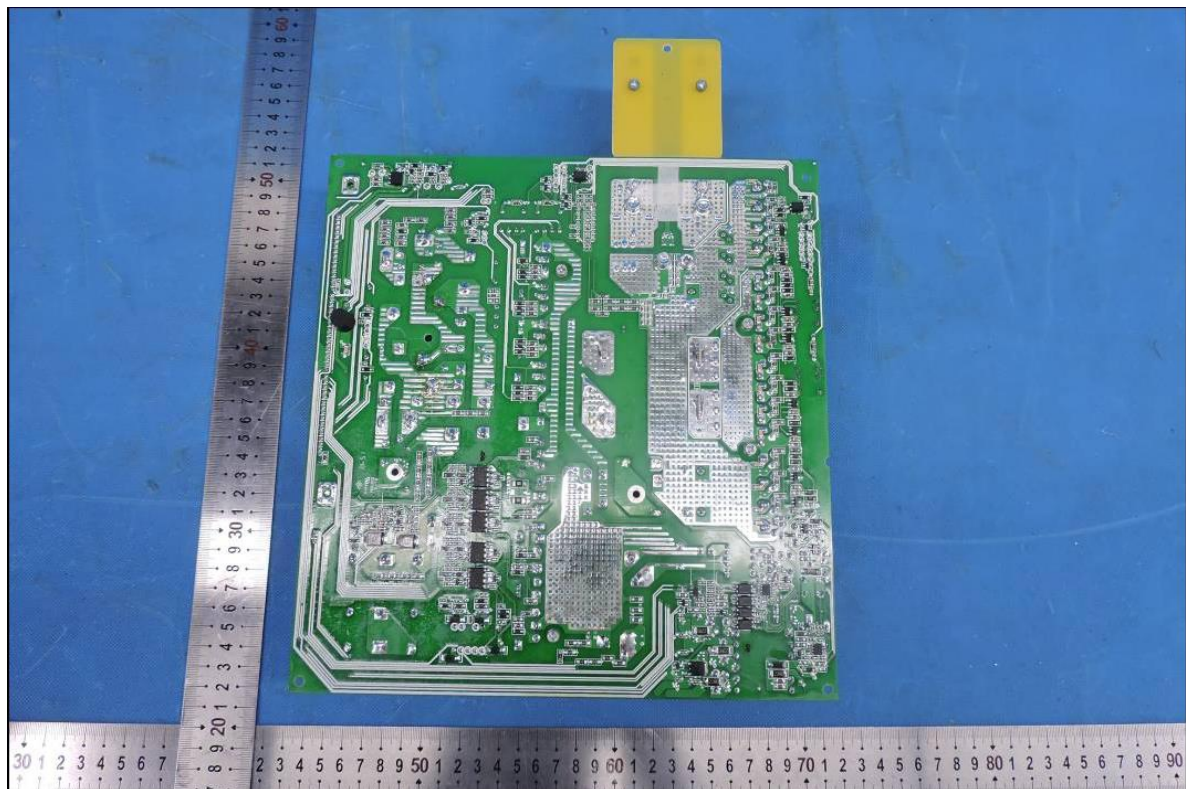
PCB of main board trace view(FlinInfini Lite 1kW-12V)
